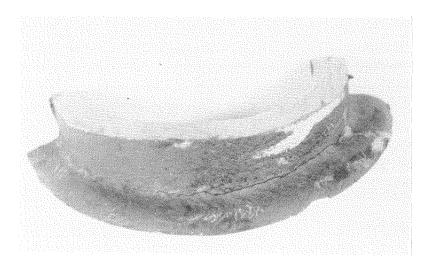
A portion of a header tube connection showing circumferential fatigue cracking at the weld.
